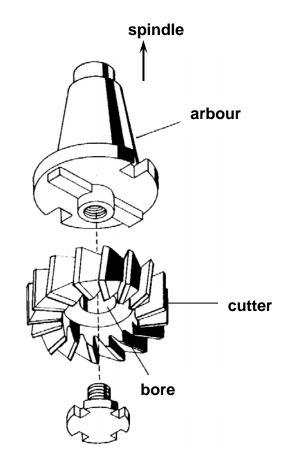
Mounting shell and face milling cutters in milling machine spindle.
